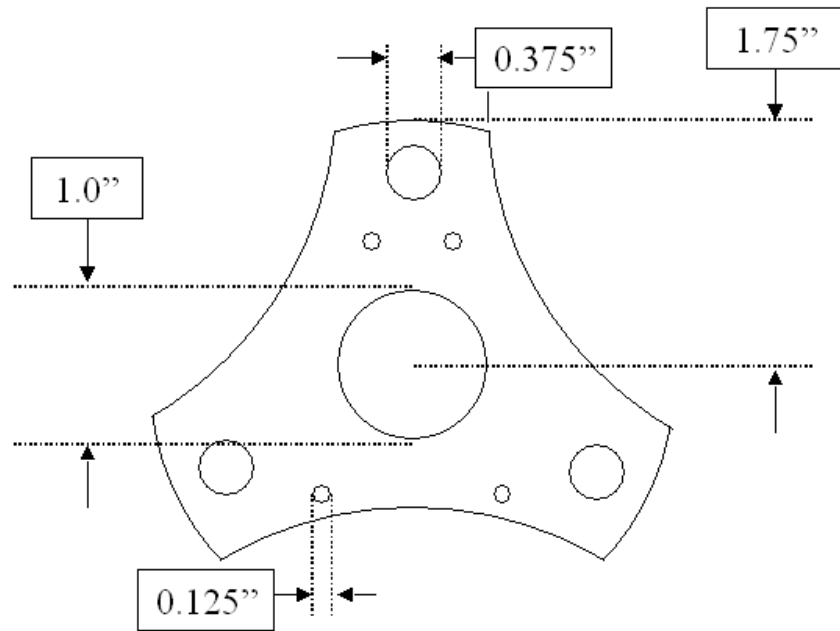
Custom built piece with a few key dimensions labeled. The 1/8" inch holes are placed to fit with the hole pattern in commercially acquired plates. The thickness of the plate is 1/4".
